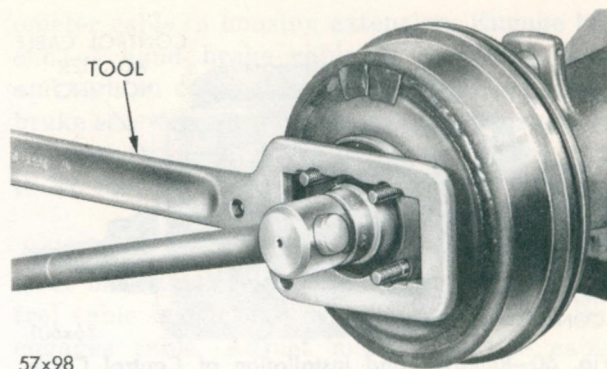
Removing Handbrake Drum and Flange (Assembly Nut)
